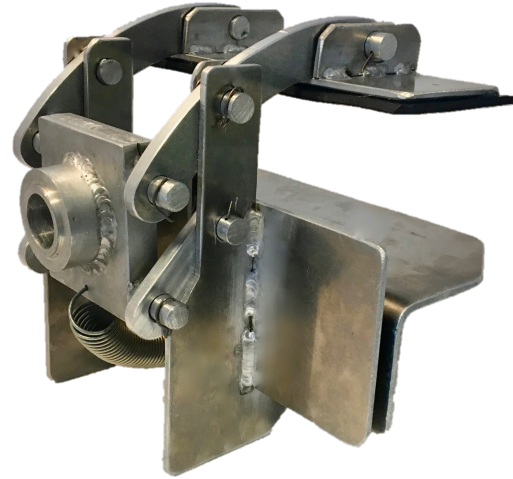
Isometric tool view from behind displaying linkage, spring, clamp and manipulator connection.
